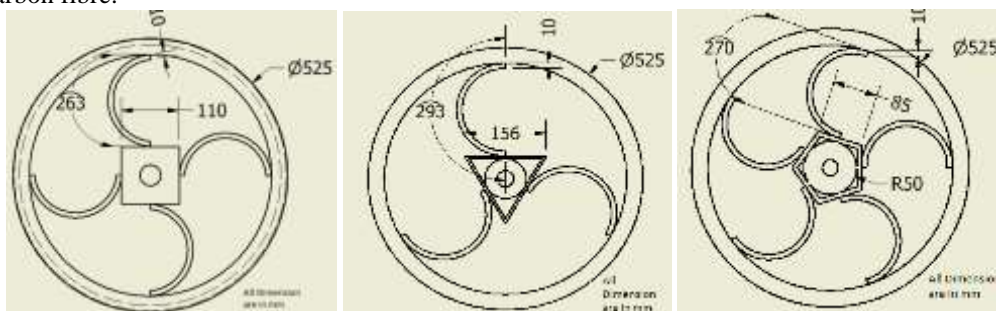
CAD design of leaf configuration of suspension wheel (All dimensions are in mm.)
